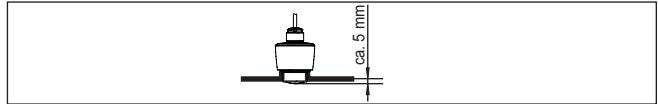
Recommended threaded socket mounting of VEGAPULS C 11
